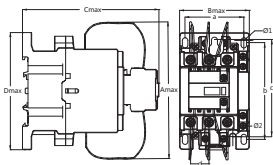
Overall and Installation Dimensions of NXCC-63 ~ 115 Contactor
